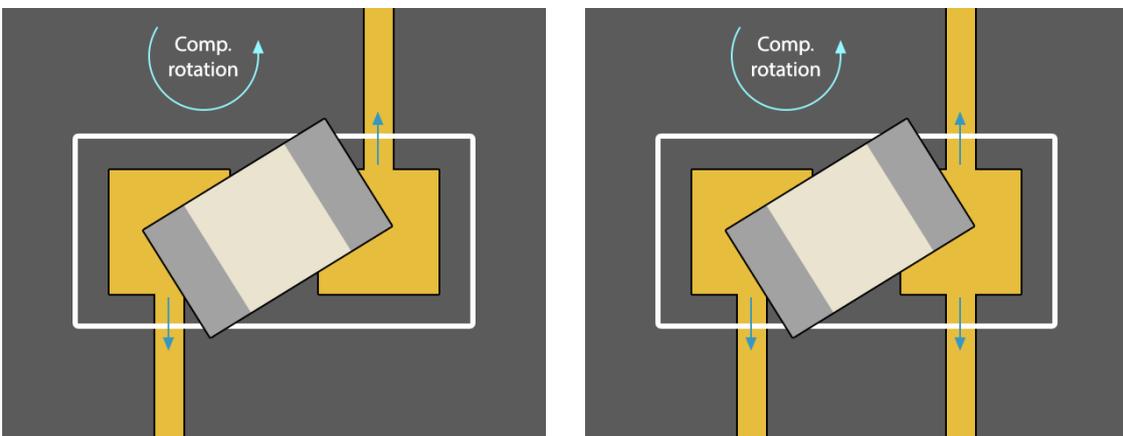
Connecting Traces to Component Lands When Using Soldermask
